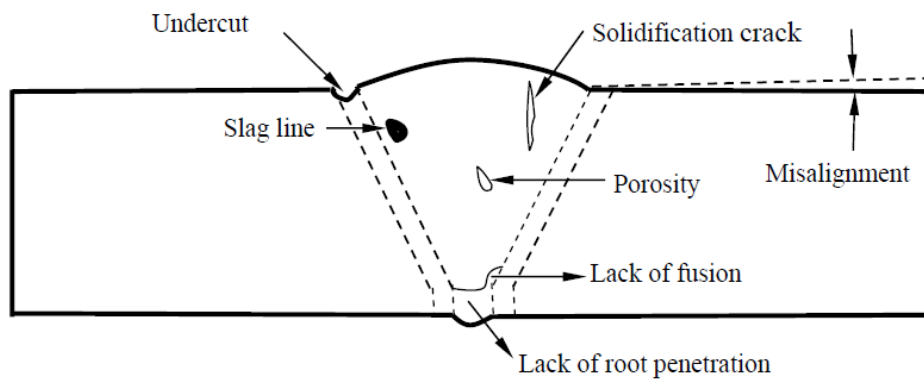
Different weld imperfections in a butt-joint [Alam, 2005]
